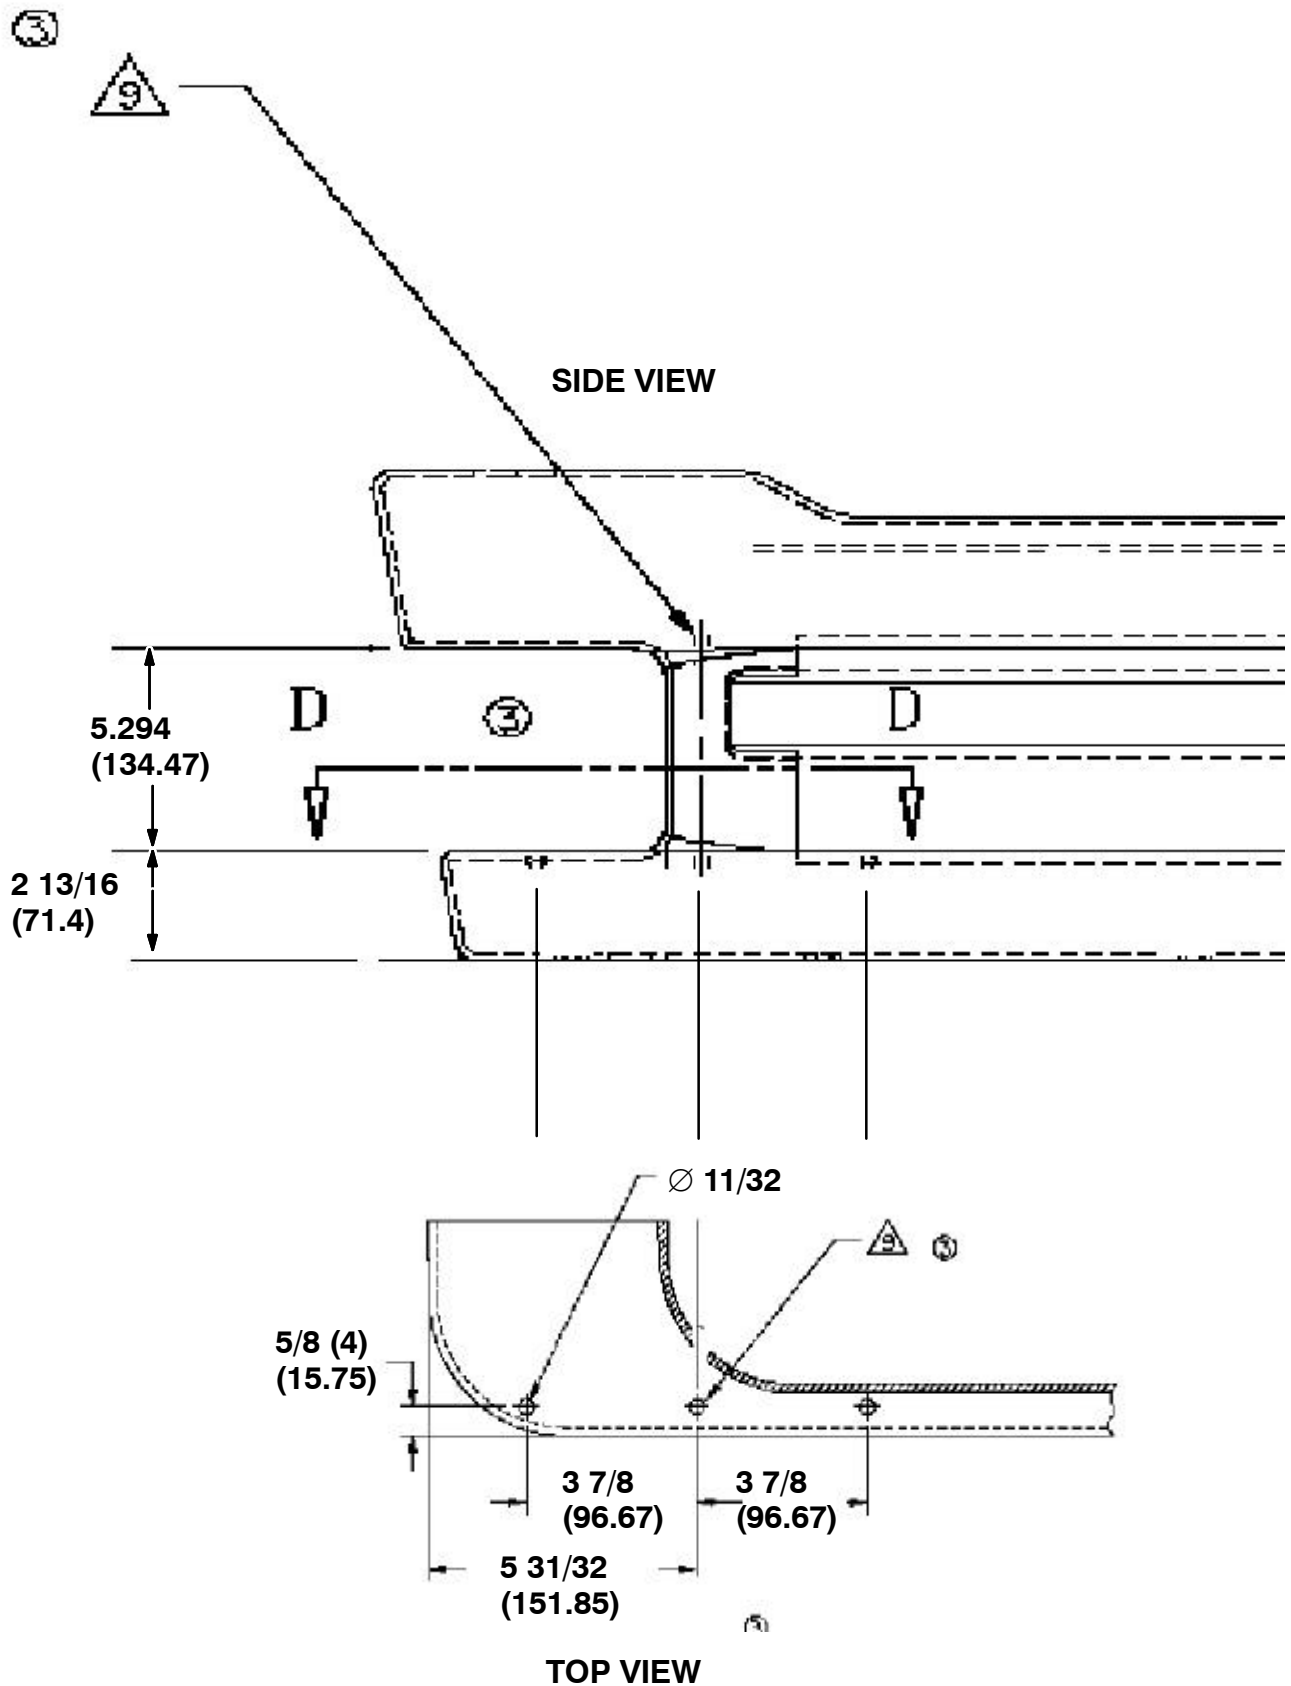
VACUUM WAND DOOR MOUNTING HOLE DIMENSIONS
